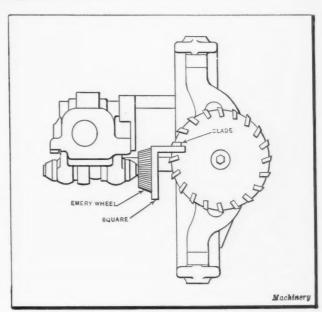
Method of squaring a Blade of a Milling Cutter with the Grinding Wheel
